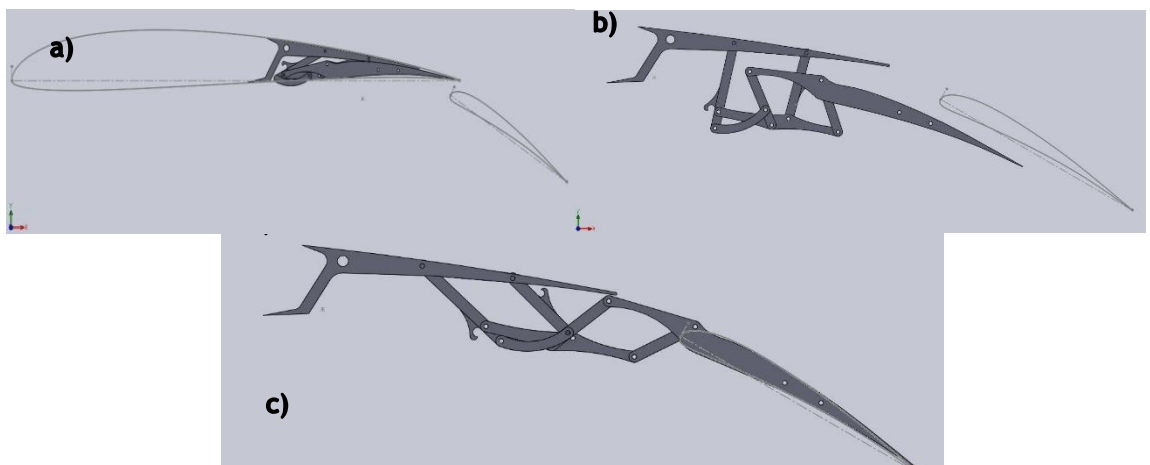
Final design of the Fowler flap extension actuation mechanism. a) initial position, b) intermediate position and c) final extended position.
